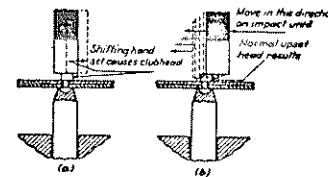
HAND-SET OPERATIONS. (a) RESULT OF SHIFTING HAND SET (b) CORRECTING AN OFF-CENTER (CLUB-HEAD) RIVET WITH A FLAT HAND SET
